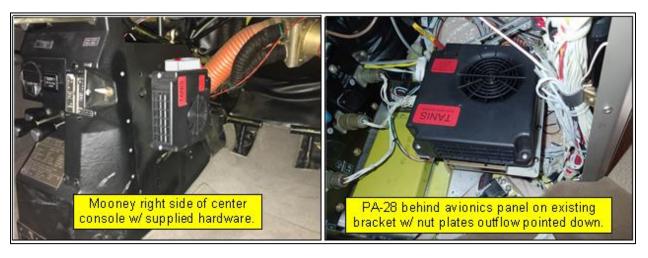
Example of heater mounting in Mooney and Piper. Installation used existing firewall passthrough for cabling routing from engine preheat power plug.
